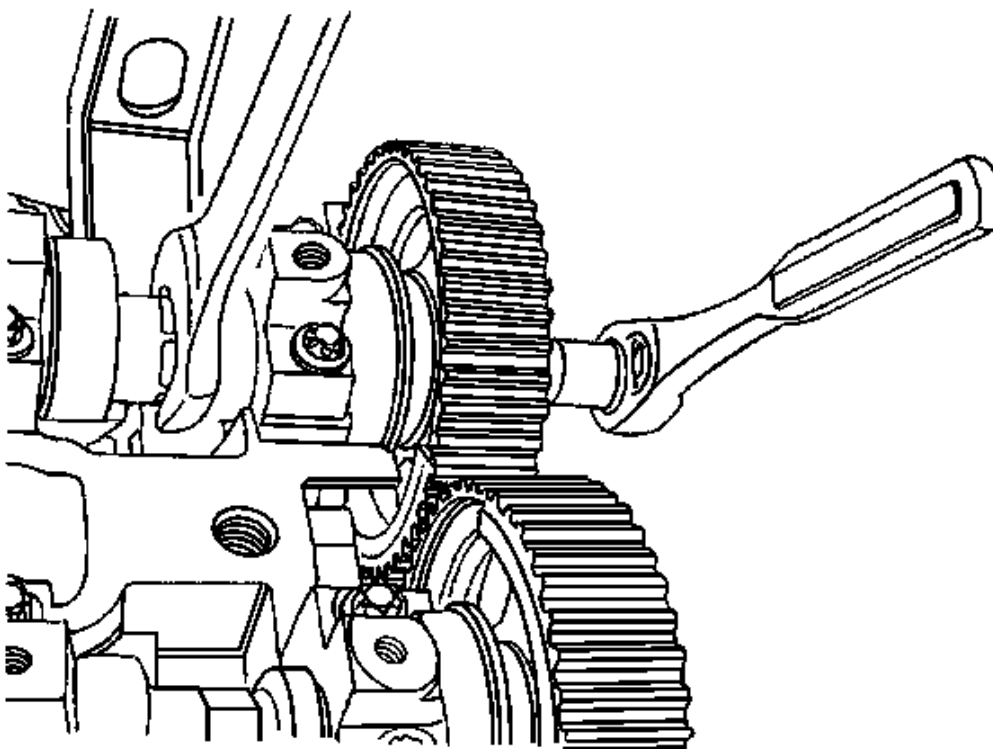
Removing/Installing Intake Camshaft Gear Bolt
